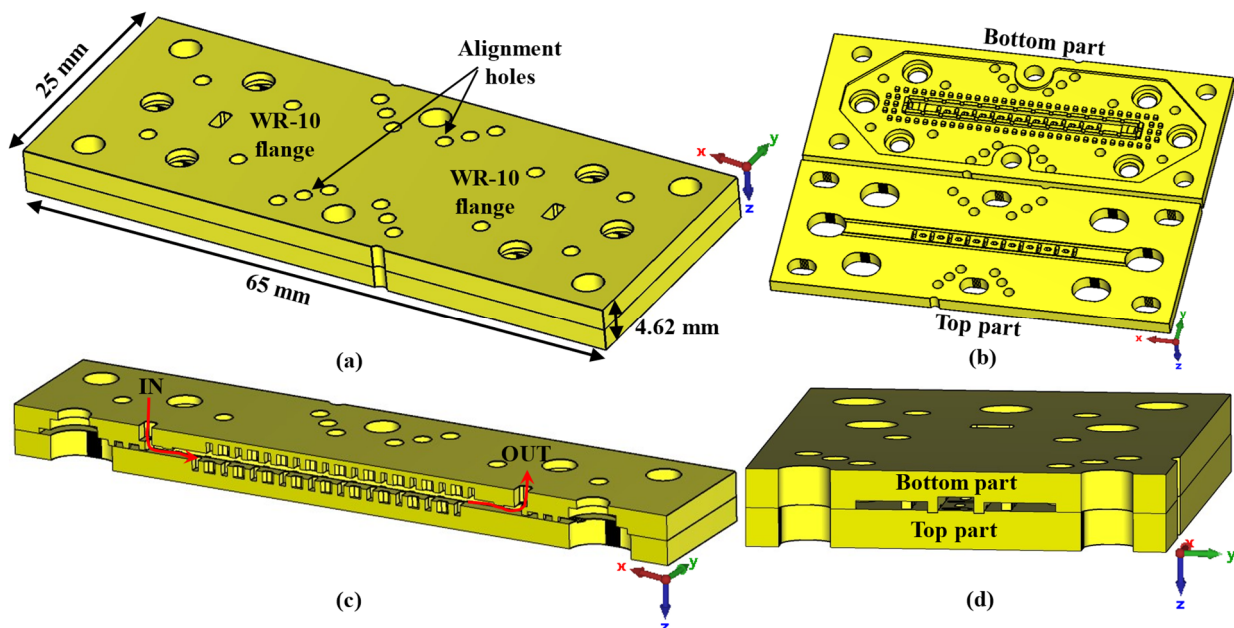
3D model of the final filter designed for manufacturing. (a) Complete assembled design, (b) interior view of the two pieces that form the filter, (c) longitudinal cut of the filter and (d) transversal cut.
